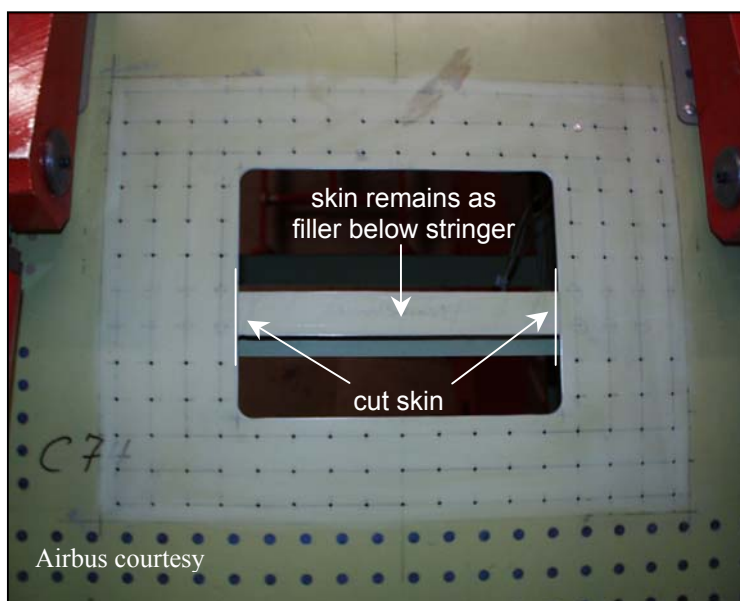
Cut out in GLARE4A skin of Megaliner Barrel between frames 73 and 74 at stringer 4 right hand side
